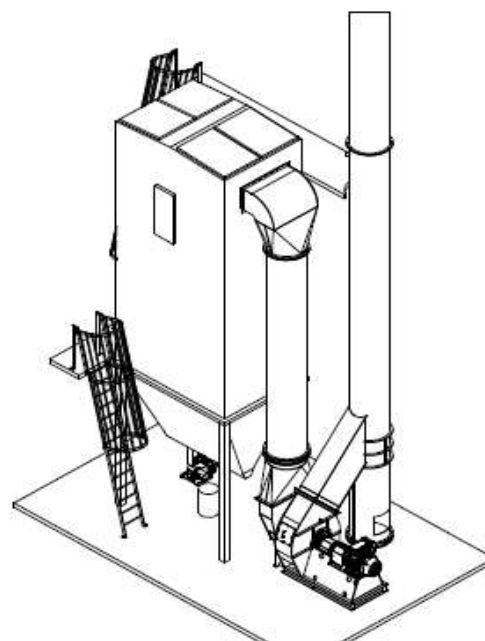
Showing a typical baghouse and induced draught fan arrangement, this for a 5MW boiler.
